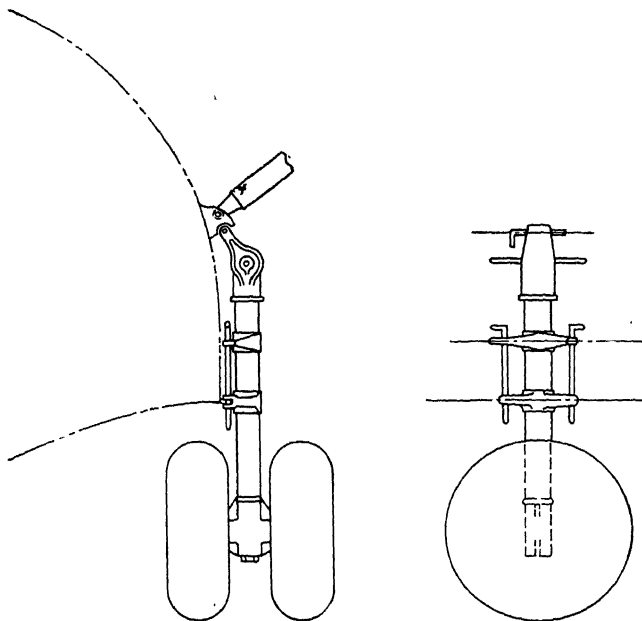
Typical flying-boat beaching gear, detachable type.
